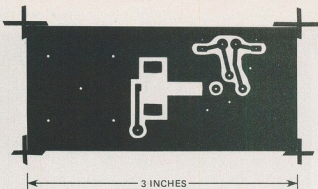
TOP OF MIXER BOARD shows where holes are to be drilled. Jack J10 will require large hole so that it can pass through board.
